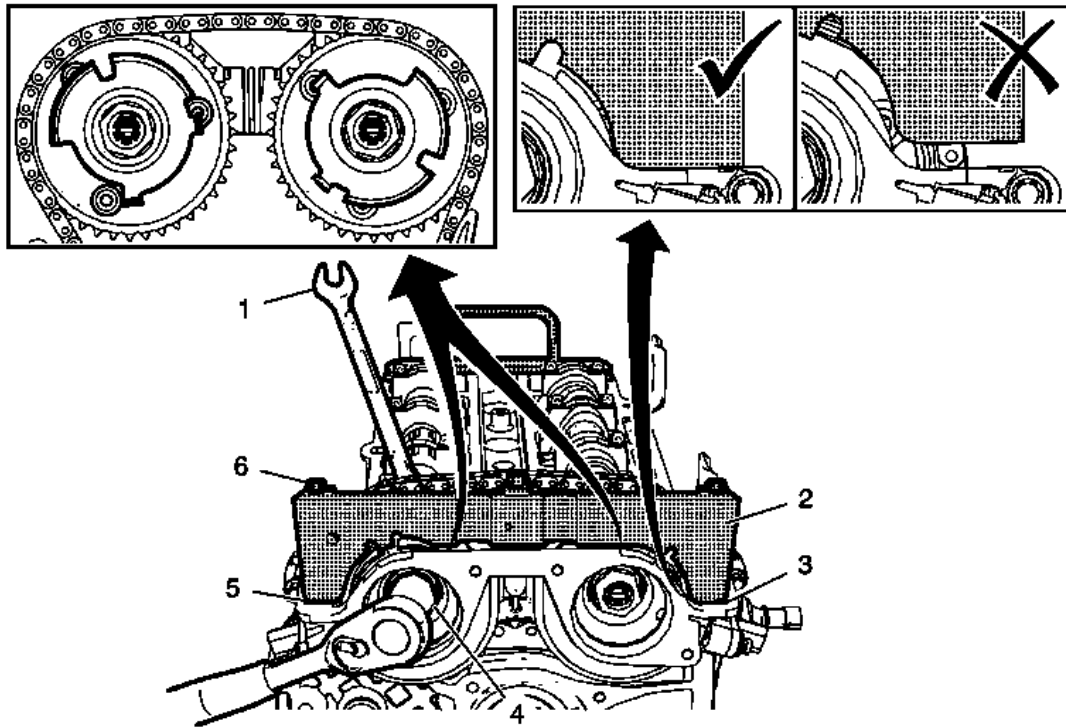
Intake Camshaft Sprocket Bolt And Cylinder Head
